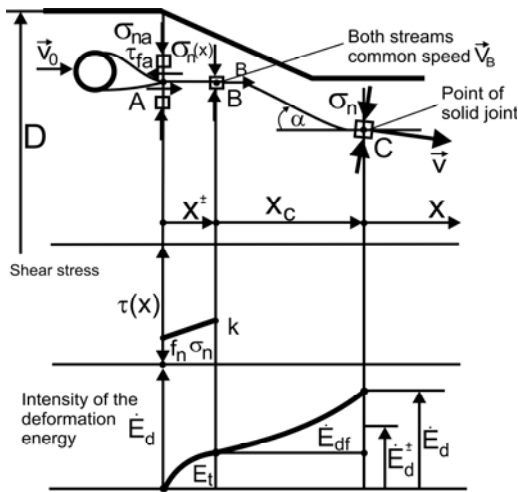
Longitudinal welding in forward hot extrusion[8,9]
